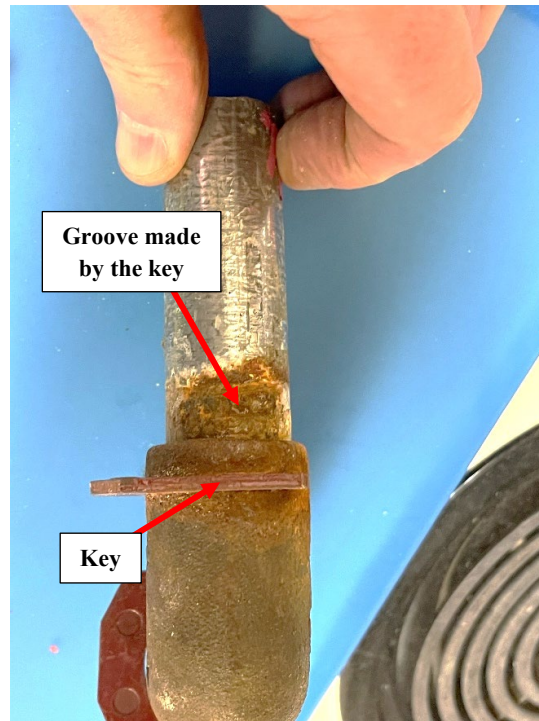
Key used to hold tubing in place in the elbow fitting. Tubing separation from fitting is visible (15092 CBS 2-025).
